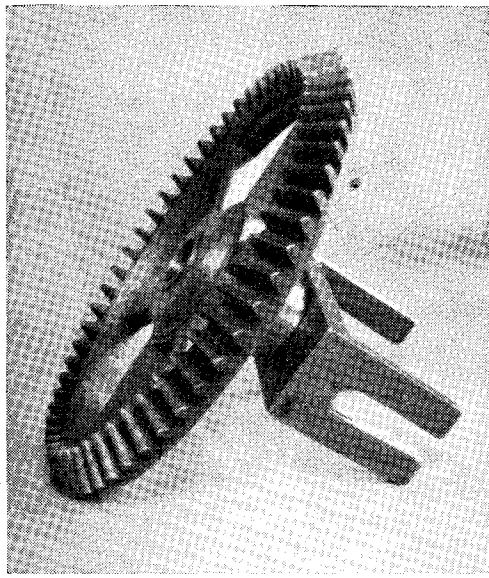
A crossed out clock wheel chucked to a hardwood block held in a jaw chuck
